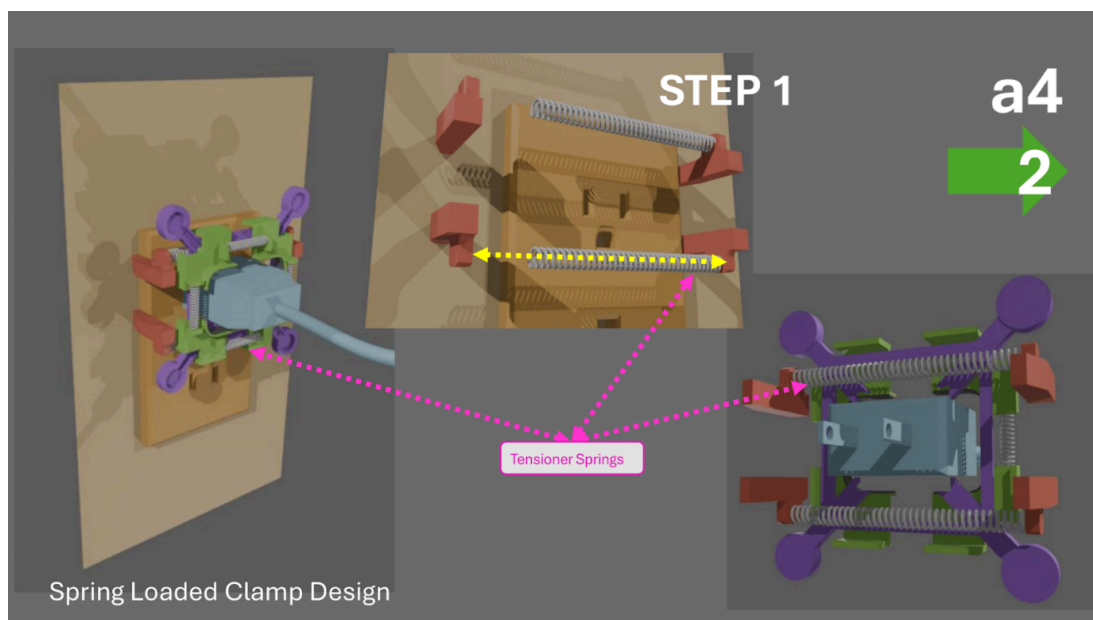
Demonstrates the Spring Clamps design and the Spring Loading mechanism.
